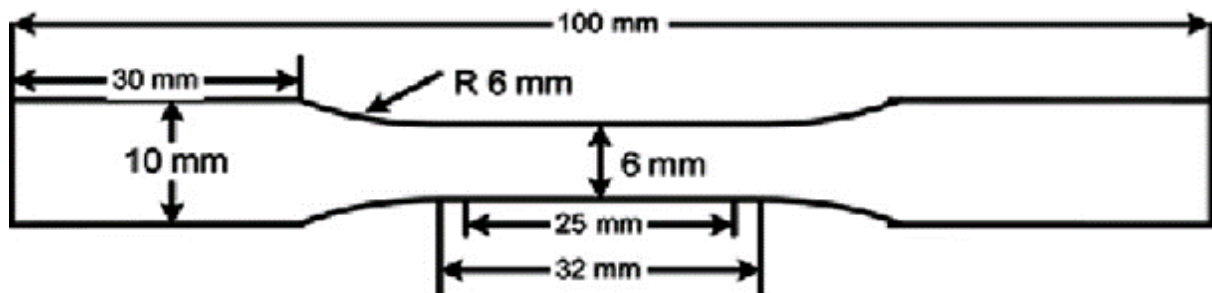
Dimensions of Dog Bone Samples ASTM D6
